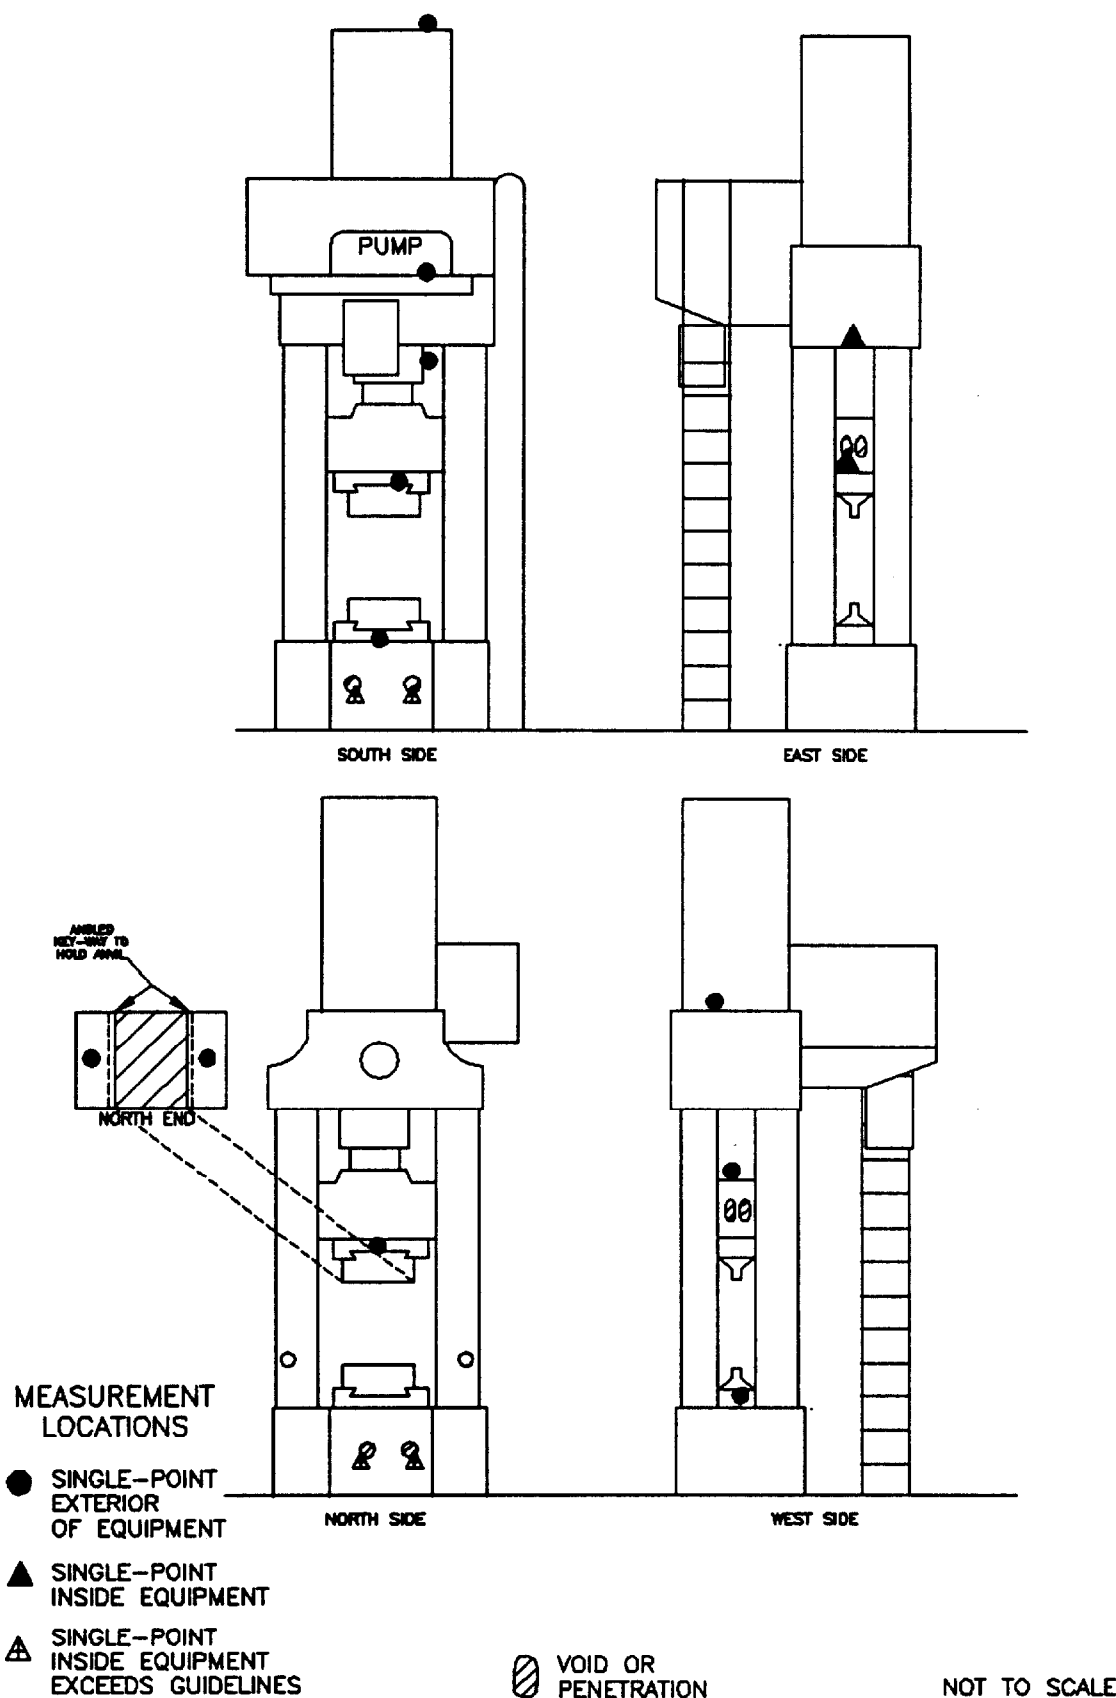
Building 30, Fabrication Room, HPM Hydraulic Press #34469 - Measurement Locations
